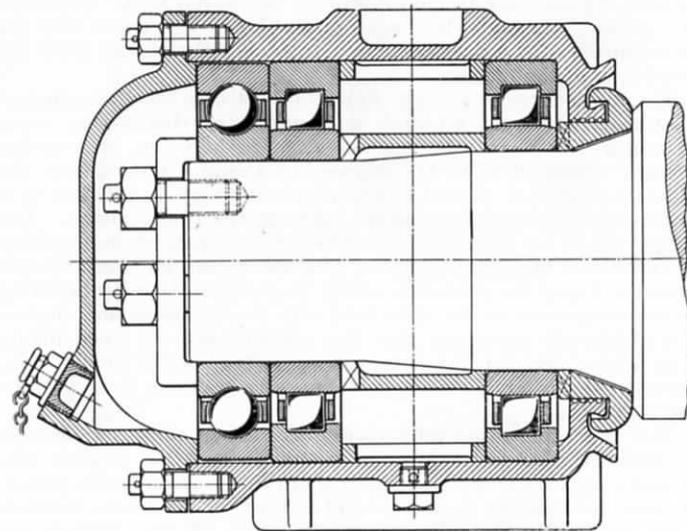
HOFFMANN ROLLER-BEARING AXLEBOX FOR OUTSIDE JOURNALS, WITH BRONZE PADS FOR END LOCATION.
